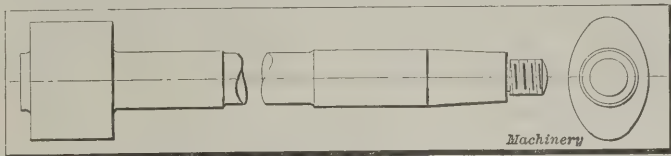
Elliptical Emergency Brake Cam turned in a Lathe
